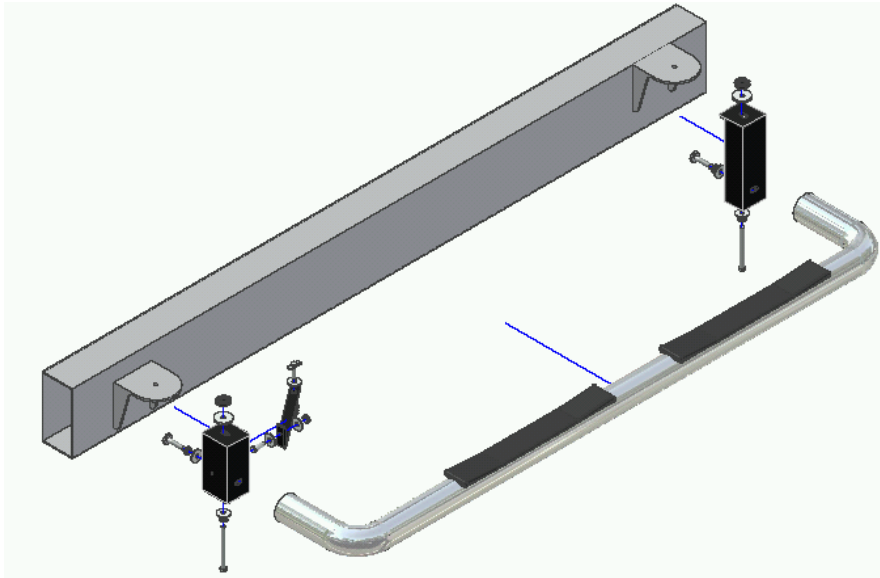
Driver-Side Front Assembly View (2500/3500 Series set-up shown)
